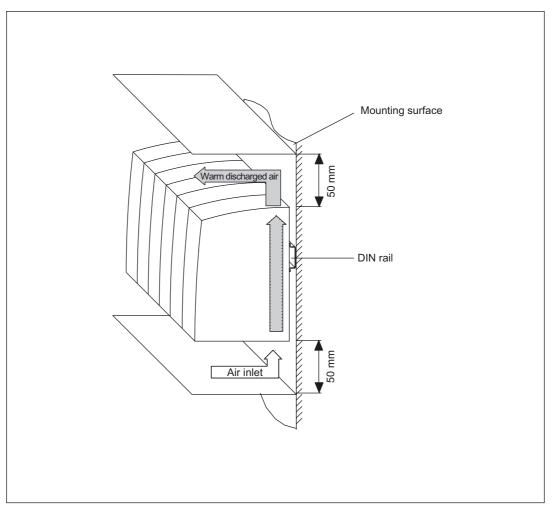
Cooling clearances, rail-mounted modules (e.g. VSM, SMC, TM, DMC)
